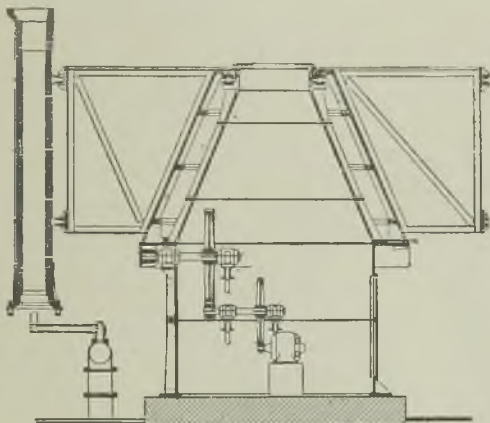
SECTION OF TABLE CARRYING BOXES.
